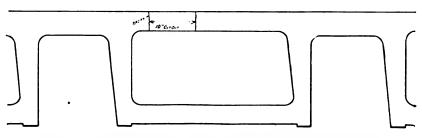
A PIECE WAS CUT OUT AT THE POINT OF FRACTURE
